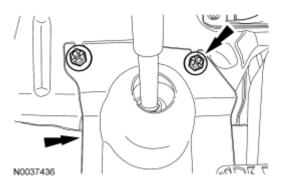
Locating Steering Joint Cover And Nuts Courtesy of FORD MOTOR CO.
